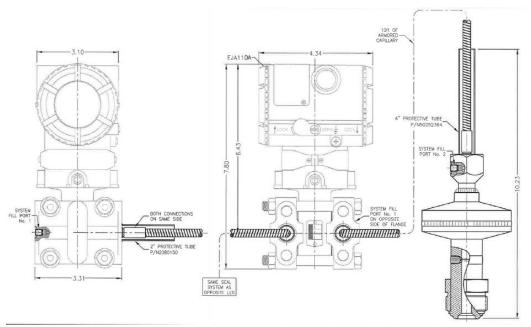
\Delta P$ gauge Assembly for Level Measurement in the Dump Tank and Expansion Tank (12).
